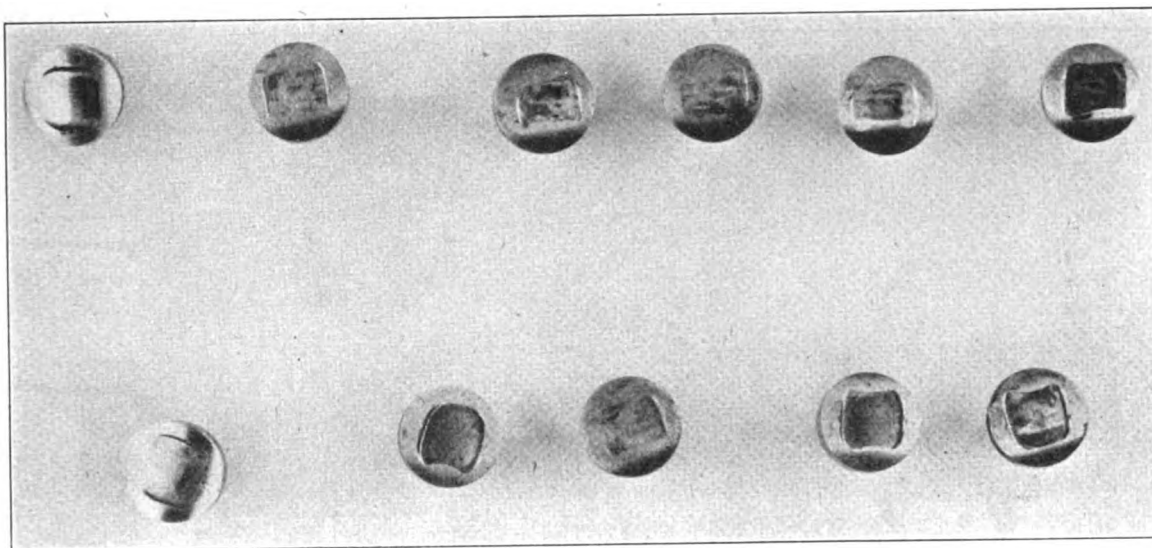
Worn valve tappets. These valve tappets were removed after running 38 hours.
